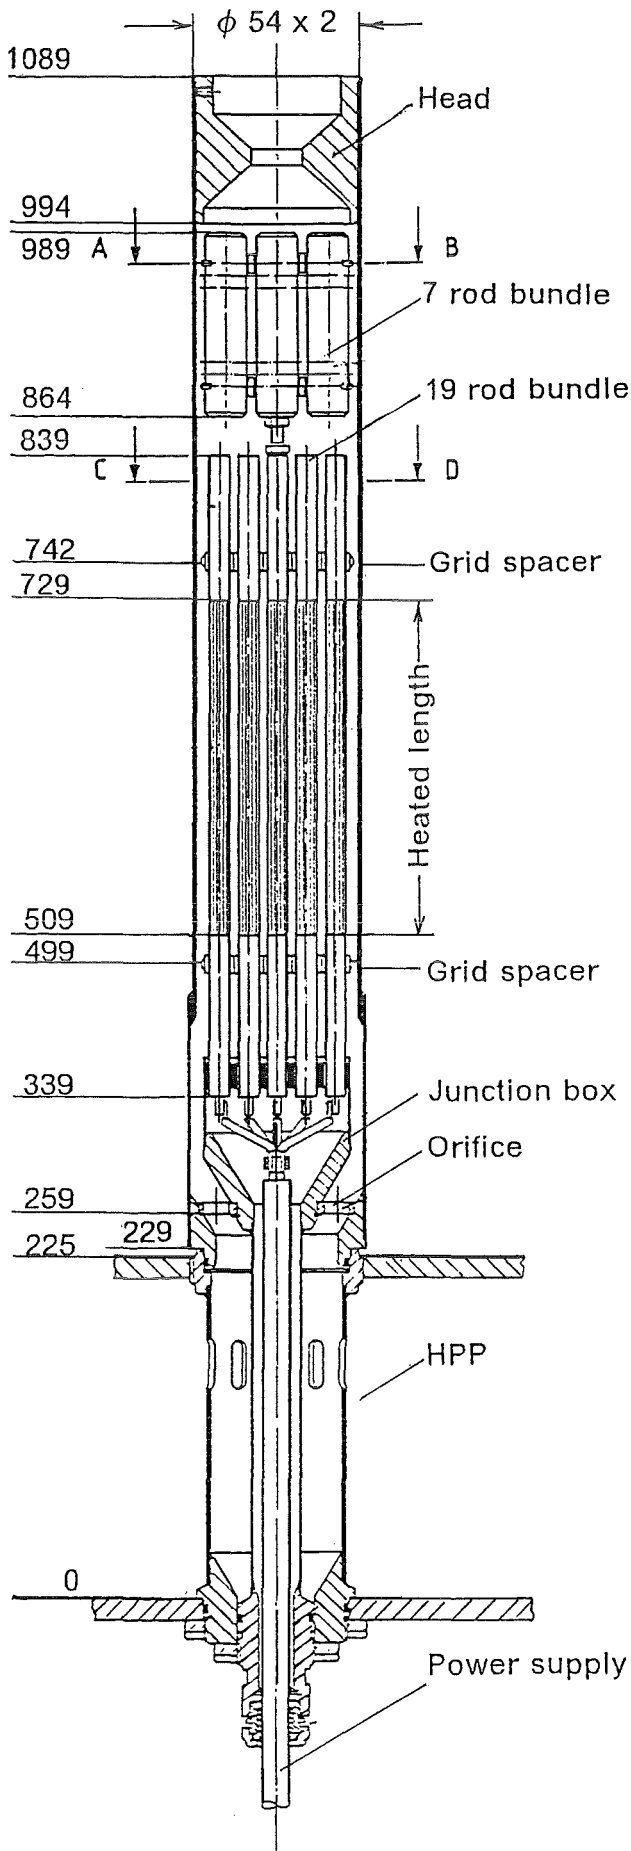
Arrangement of 19 electrically heated rods in a bundle (dimensions in millimeter).
